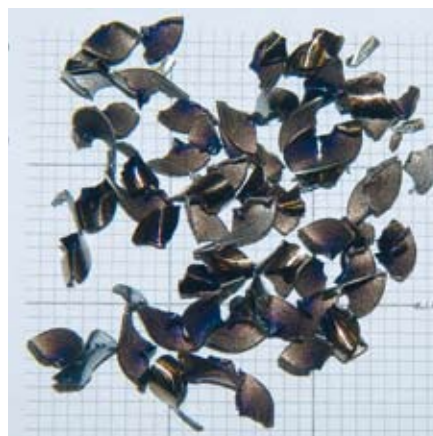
Problem-free chips preventing chip congestion and jamming of the tool.
